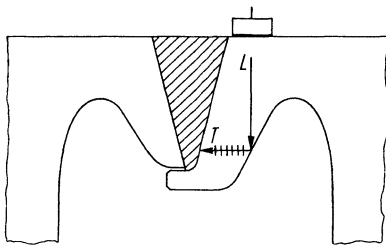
Testing the root of a weld using a 61° reflection
